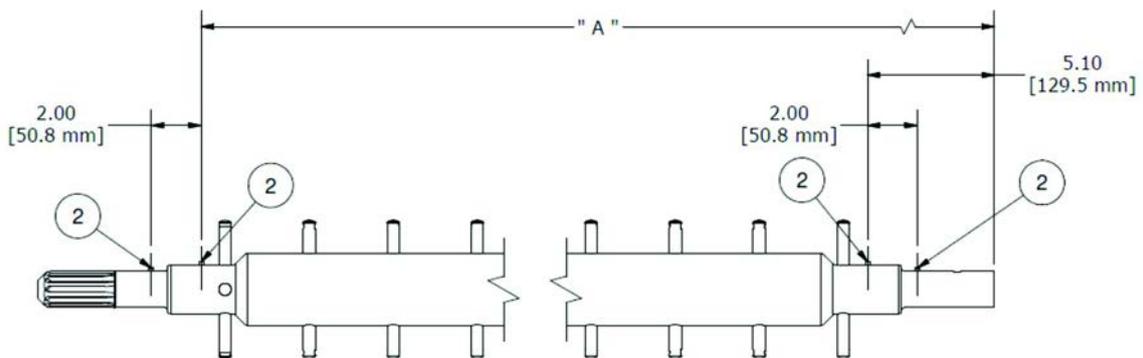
Seal Pin Locations for Rotors with External Lower Bearings
